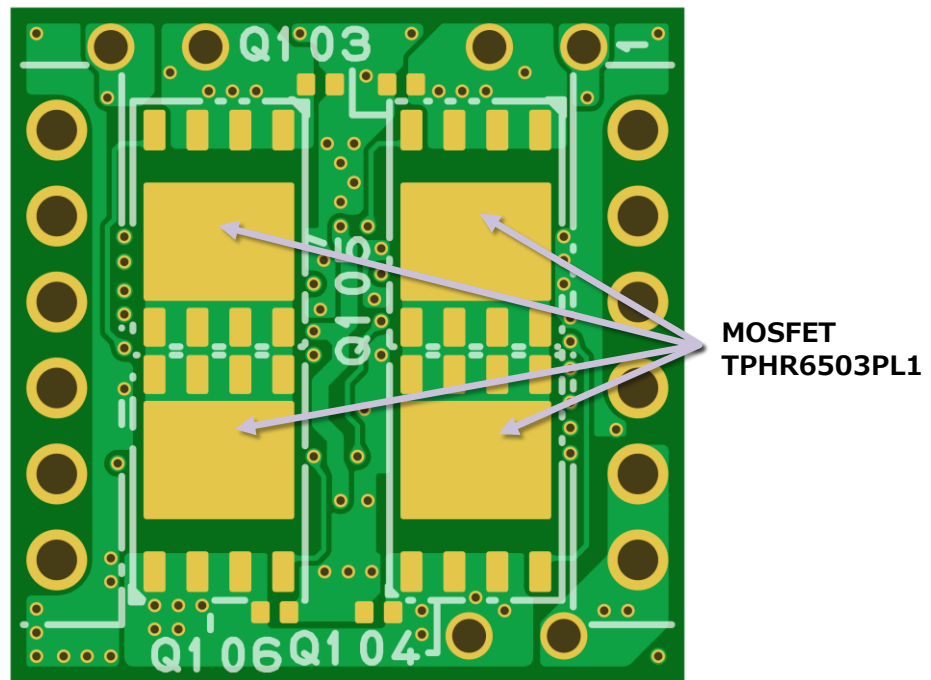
(b) Module Board Main Component Layout (Back Side - Example MUX1)
